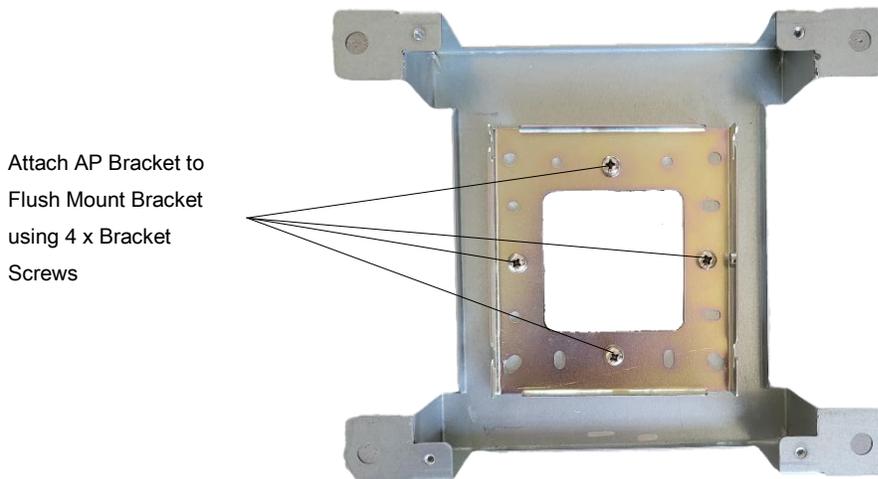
APV3-BDA - Mounting Standard Mounting Bracket to Flush Mount Bracket
